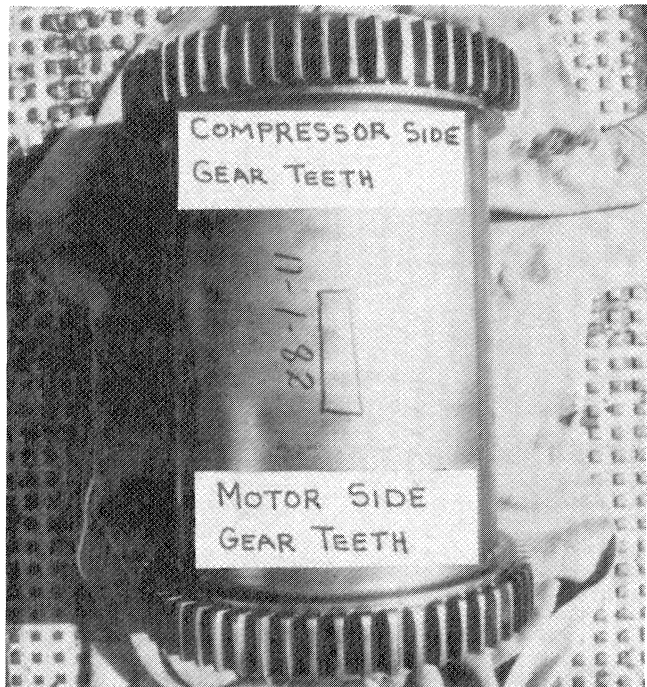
Teeth on the Coupling Spool Piece Showed Excessive Wear for a Nine Month Run.
